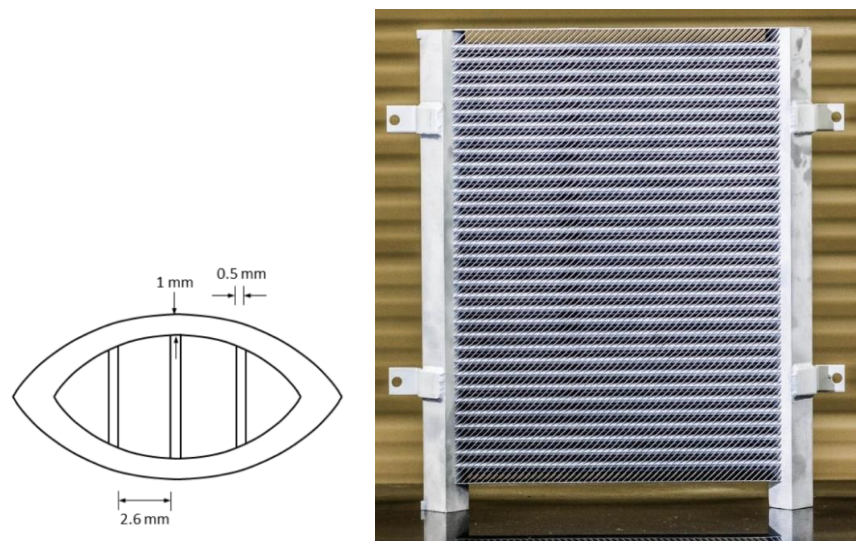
AM oil cooler with lenticular tube shapes and offset strip fins
